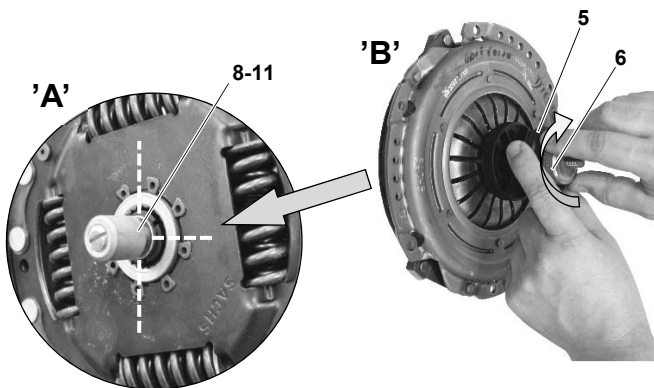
Turning the lock nut until it slightly touches the pressure plate.
